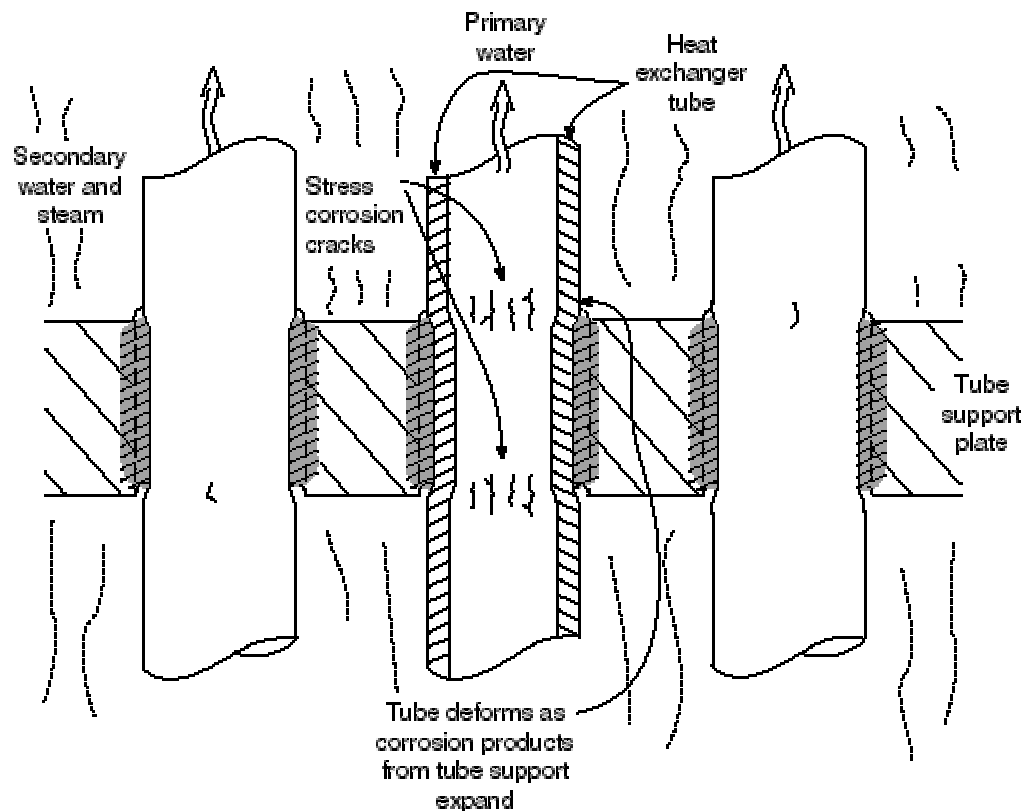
Illustration showing denting and other types of tube failures [Ref. 58].
